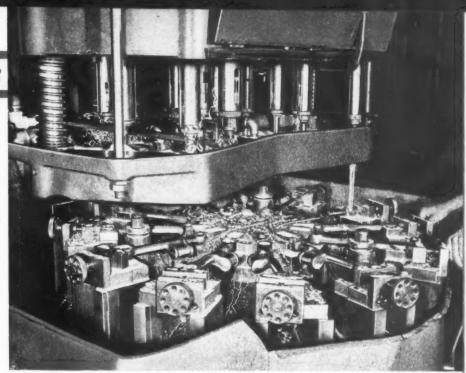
King-pin Holes in Steering Knuckles are "Bearingized" to Obtain a Smooth, Hard Surface Having Good Lubricating Qualities
